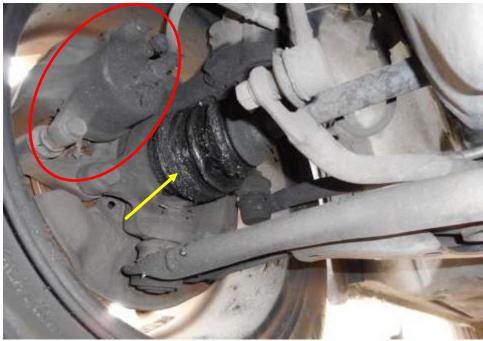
shows the brake hose/pipe and the brake caliper (circled) at the front right wheel of the Motor Car, old brake fluid stain was observed on the surface of the brake caplier. Visual examination revealed that the rubber of the right outer CV joint is broken with grease flowing out (yellow arrow).
